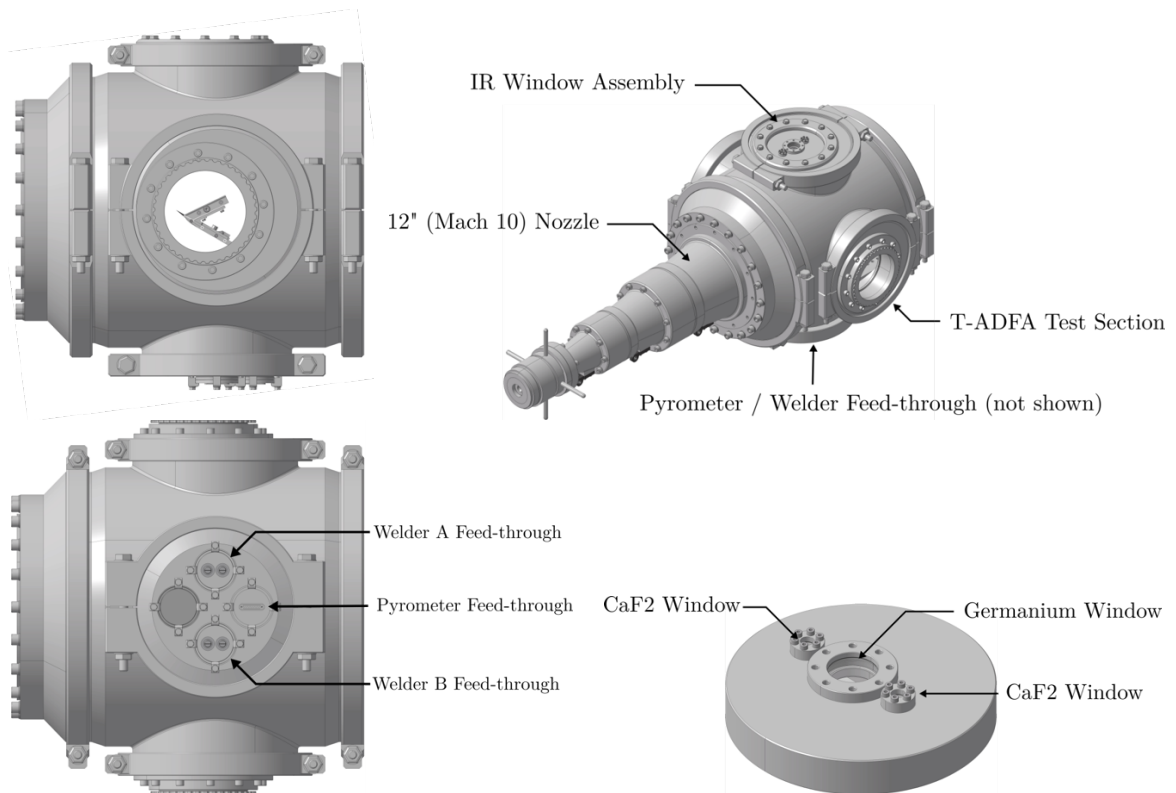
Detail of test section configuration (a) elevation with model, (b) underside showing instrumentation and power pass-throughs, (c) assembled test section with nozzle and (d) observation windows.
